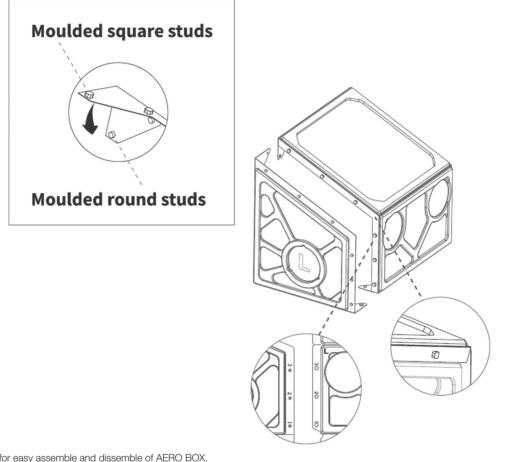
Stubs design for easy assemble and dissemble of AERO BOX.
